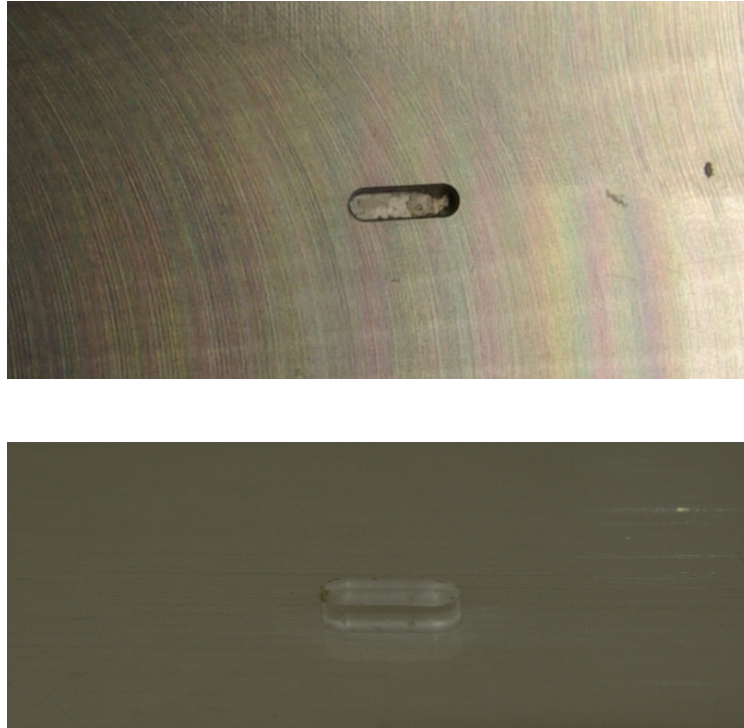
Top: Grooves in the casting mold used for positioning of pins; Bottom: Pins on a casted fibre mat
